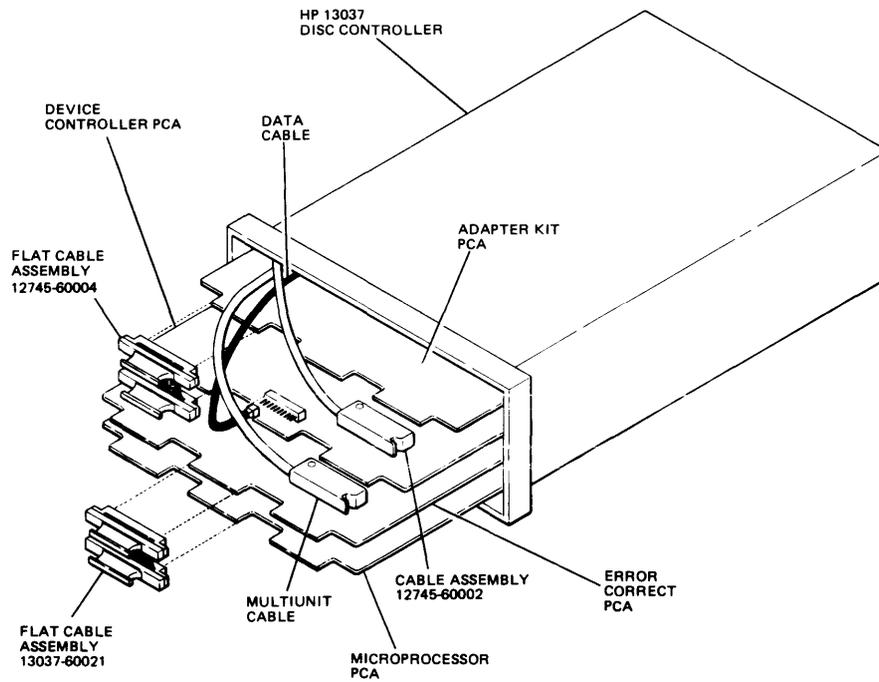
13037 Disc Controller Front Panel, Cabinet Mounted
